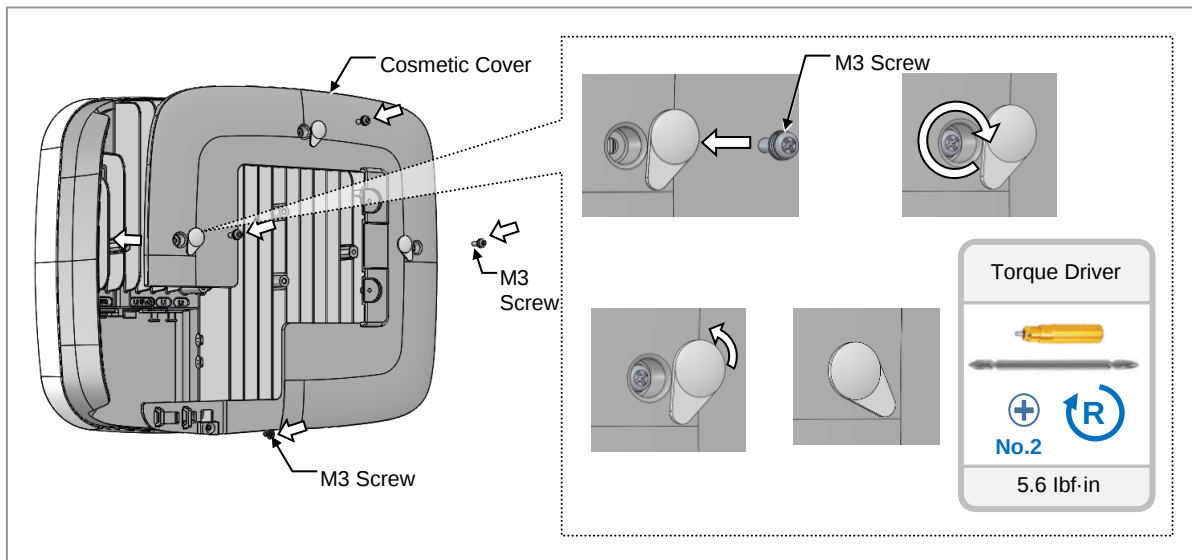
Fixed Mount-Cosmetic Cover Assembly (1)
